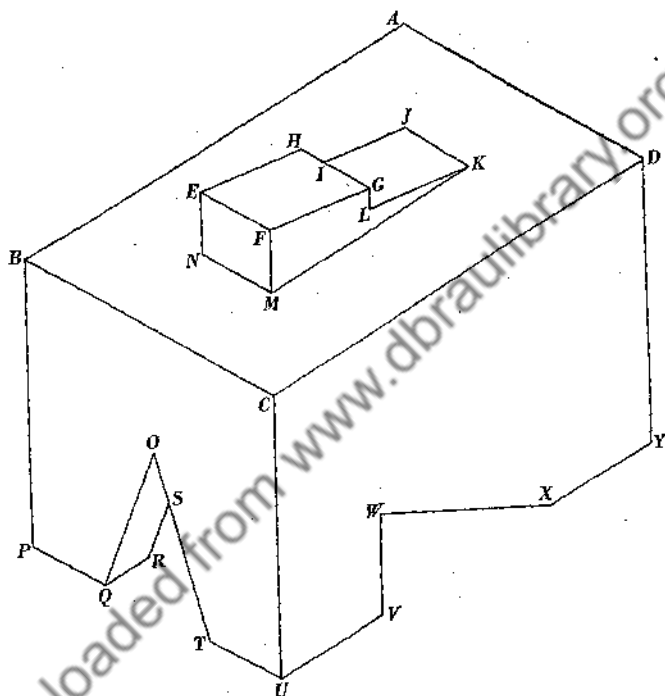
Isometric Drawing of Shoe-Shining Box.
